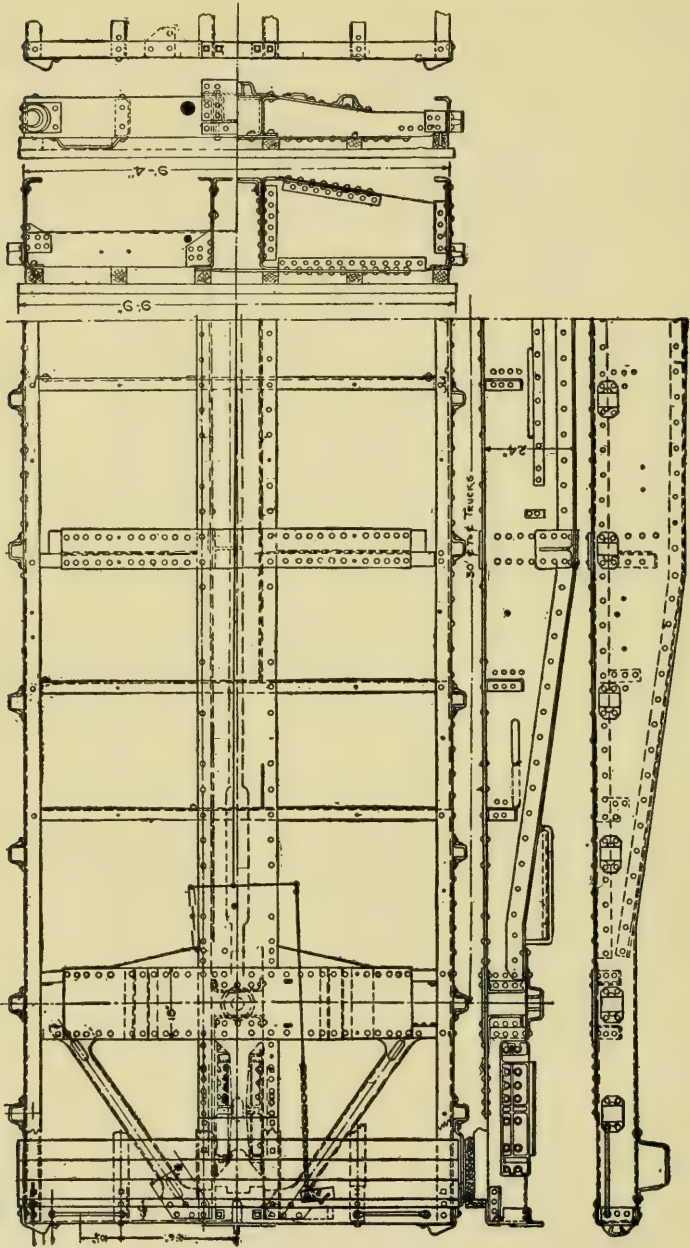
Sketch Showing General Construction of Pressed Steel Flat Car.
